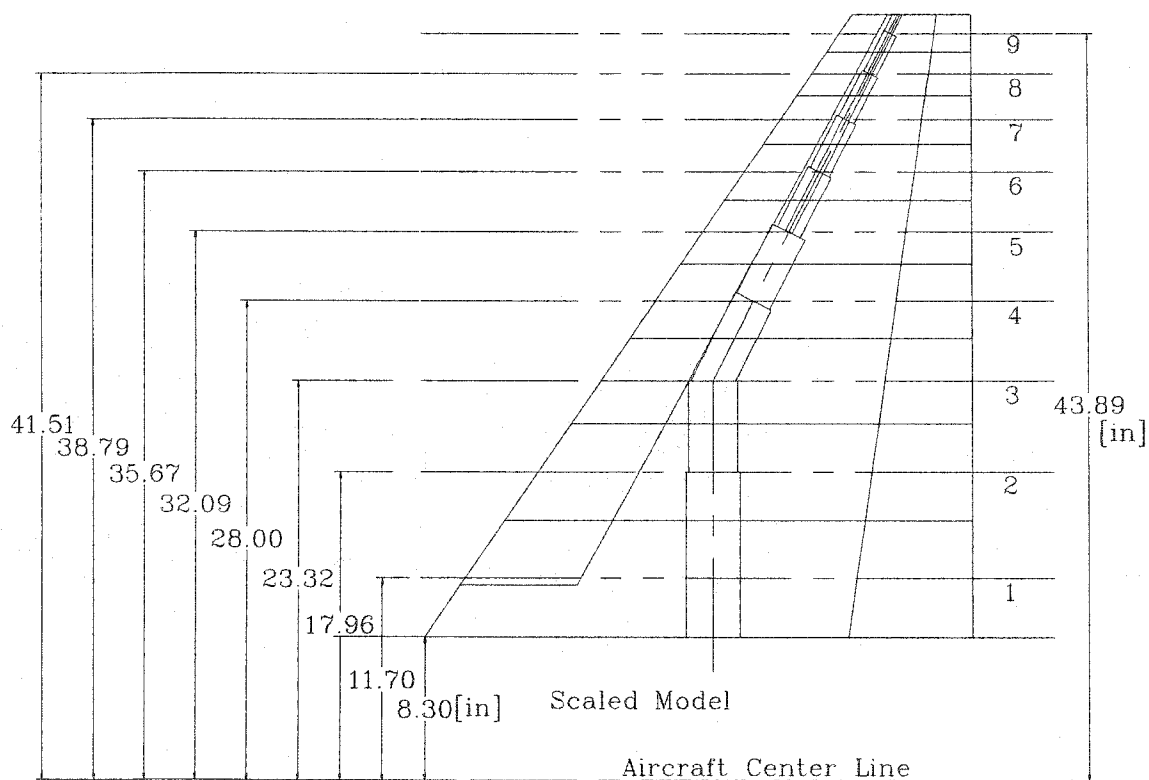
Plan View of the Test Wing and Reduced Scale Model⁸⁹
